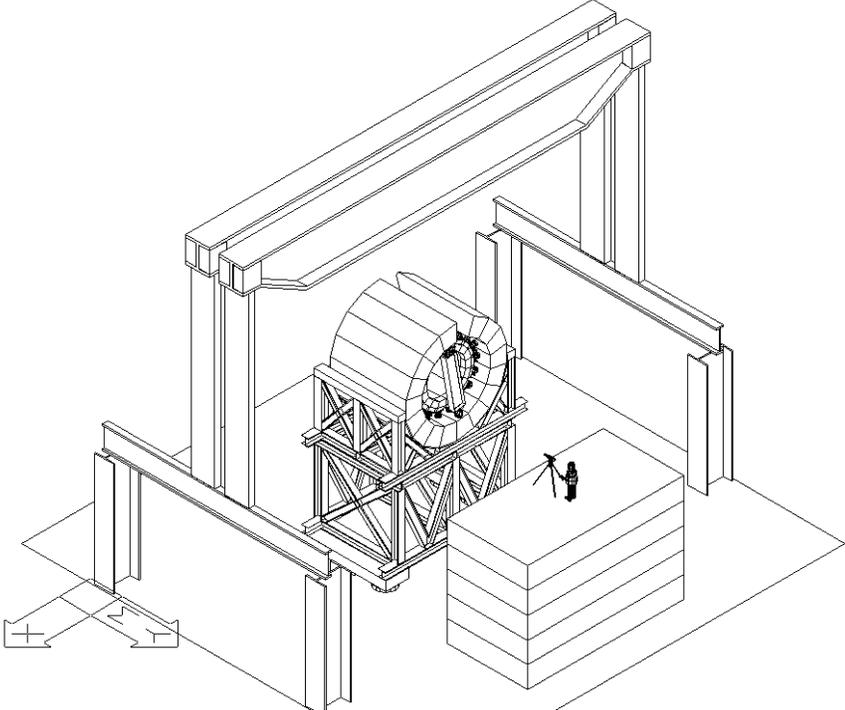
CMS HCAL barrel assembly / installation step 7.
